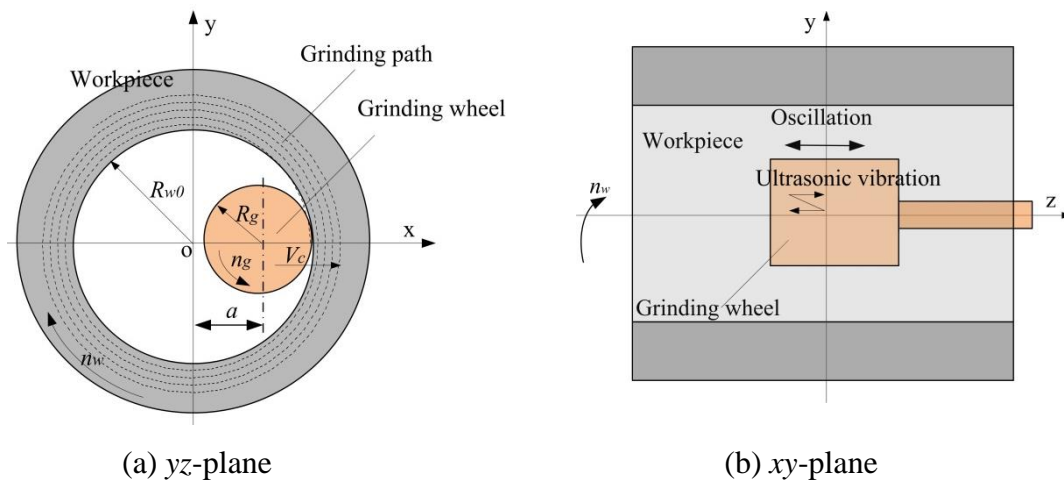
Geometrical arrangement between grinding wheel and workpiece.
